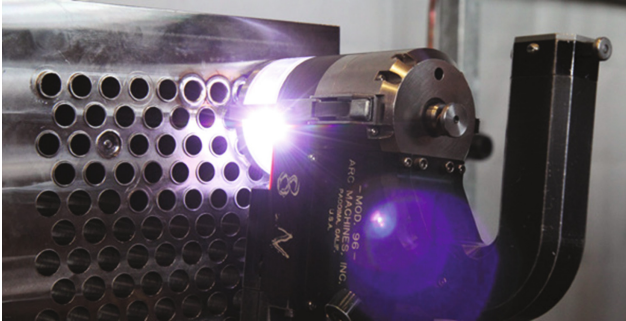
Tubesheet welding. Specialised GTAW cell for autogenous welding of tubes and tubesheets [7]
